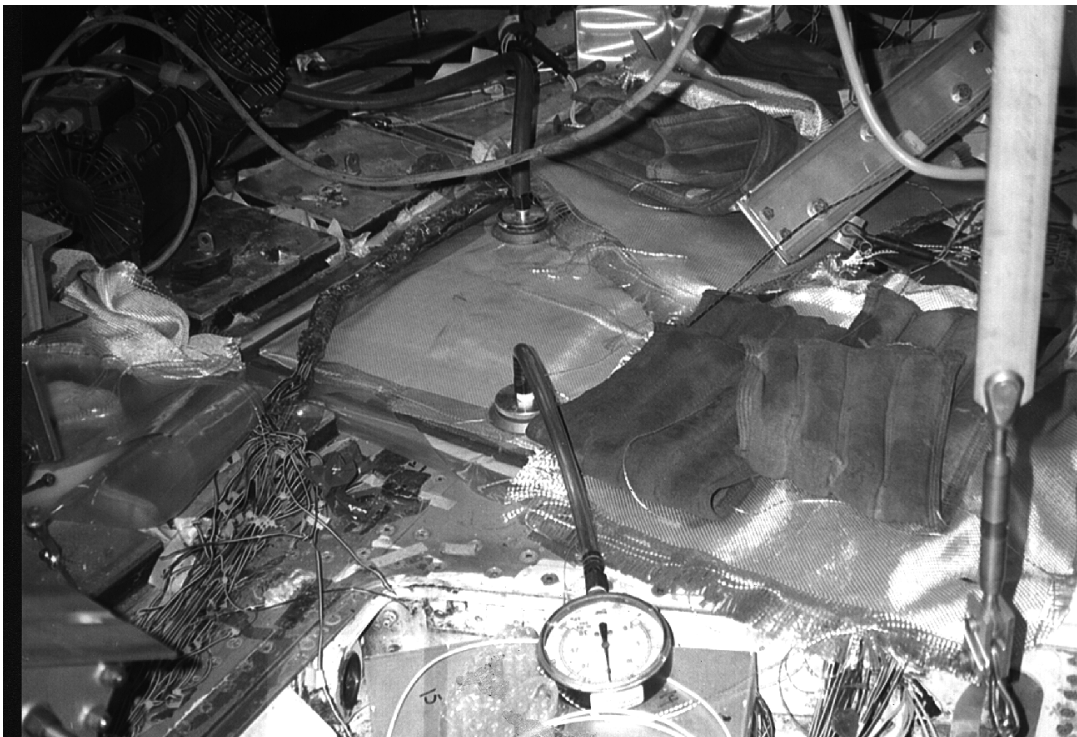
T-38 Lower Wing Skin Composite Patch Repair
